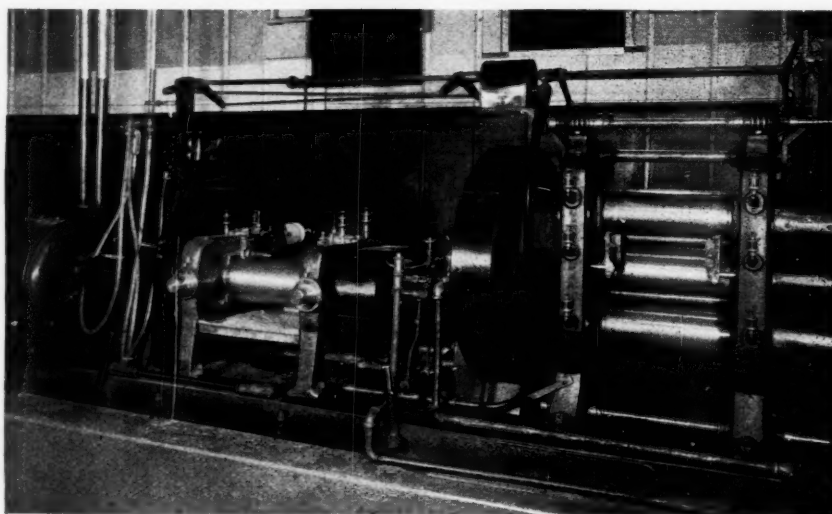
Warming-up Mill and Calender Used for Rolling Rubber Sheet
